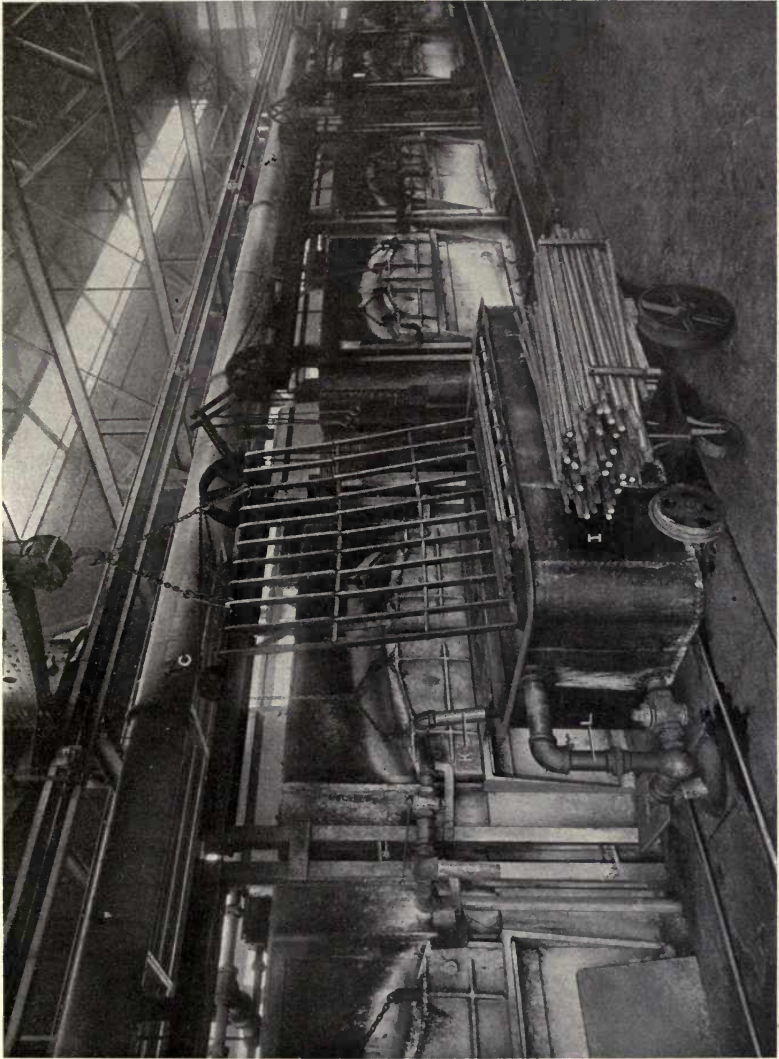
Dumping the Drive Shafts from an Oil Quenching Tank into Truck. ("Machinery.")
